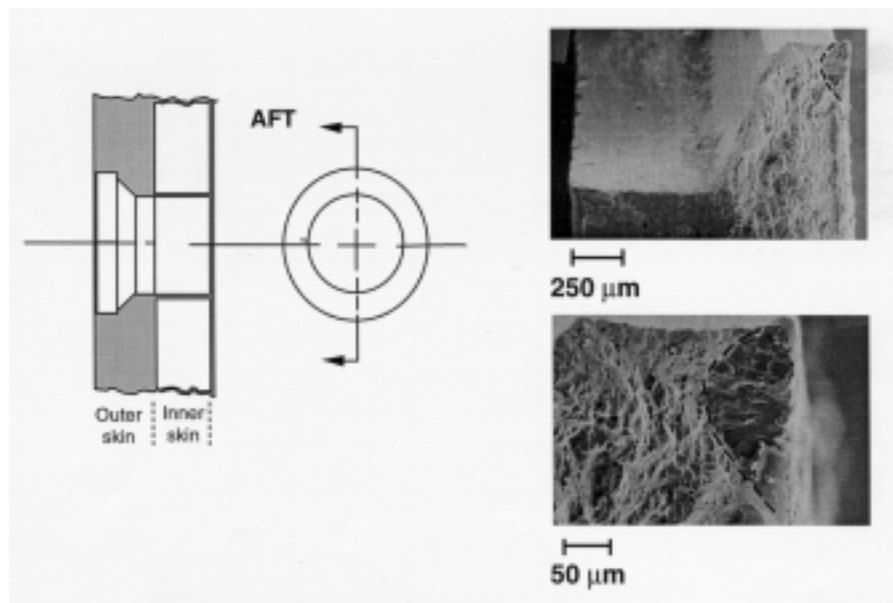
(b). Small Fatigue Cracks at Rivets.
